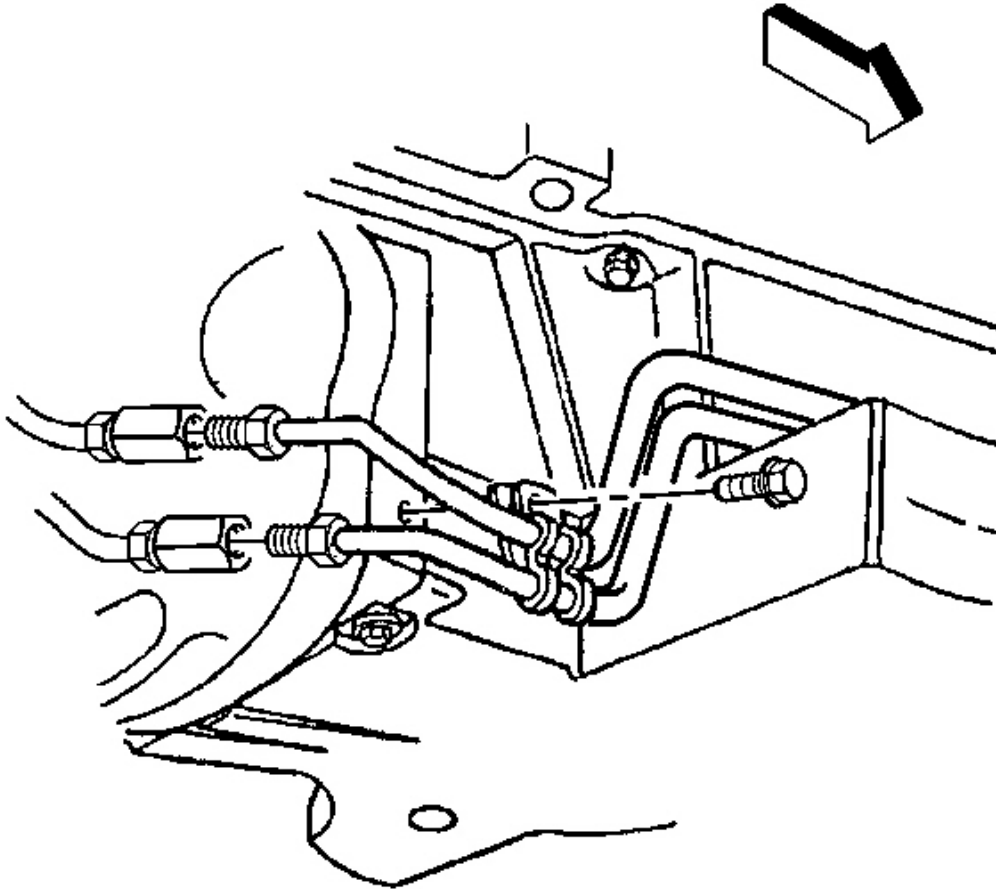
Automatic Transmission Fluid Cooler Line Clamp & Bolt
